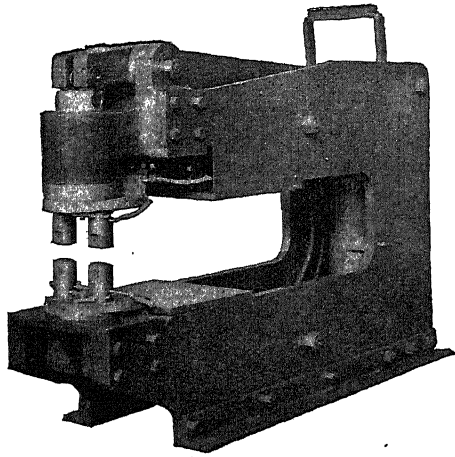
DUPLEX SPOT WELDER.
